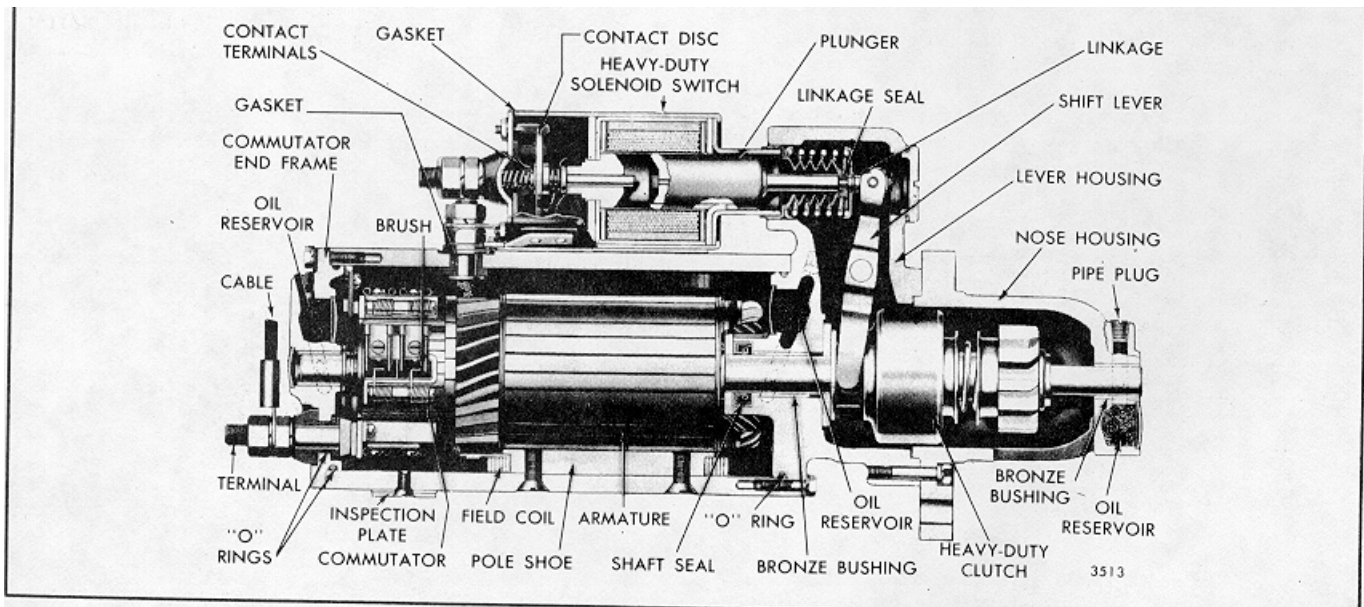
Cross-section of Starting Motor with Sprag Heavy-Duty Clutch Drive
